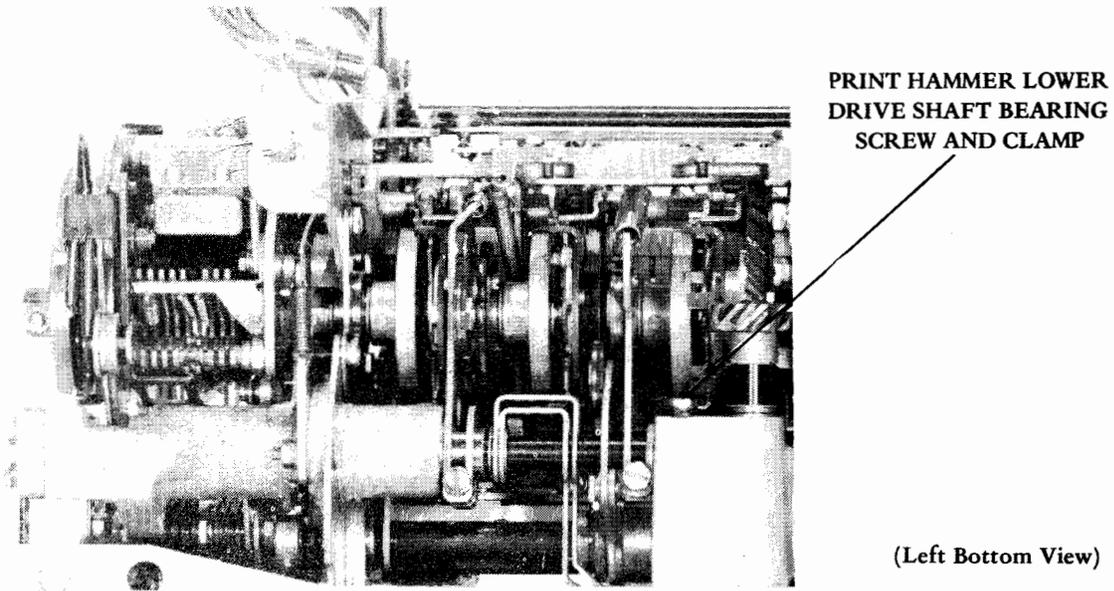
Bottom Section of Unit Used in Connection With Front Plate Assembly Removal
